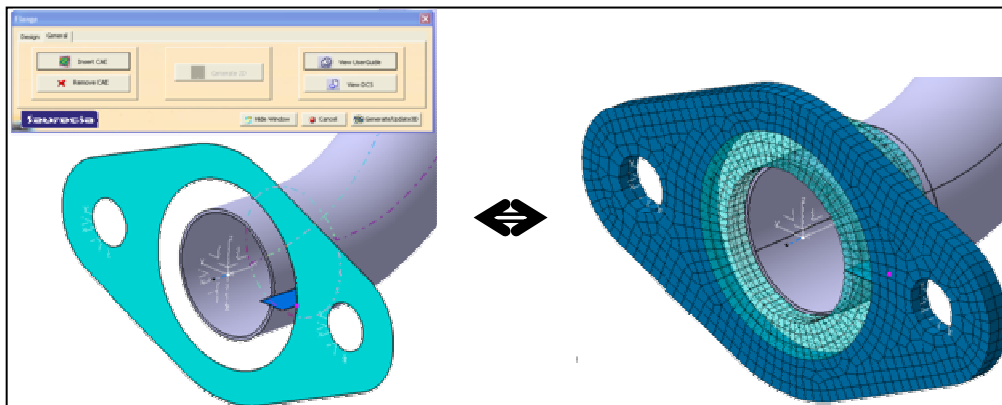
Welding Mesher tool covers all the operations from geometry preparation to meshing.
